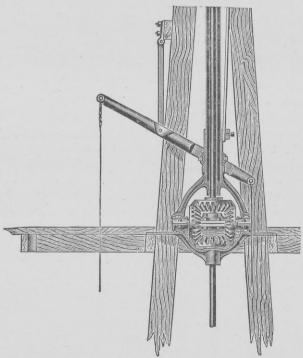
Swivel gearing of mill No. 50—12-foot wooden Monitor.
